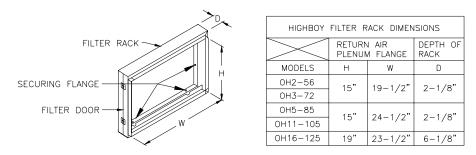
A typical filter rack and dimensions for the highboy furnaces.
